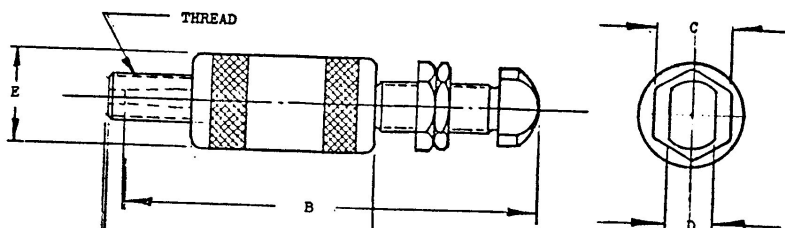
Type III, Class 3 expanding tools, plunger type, spark plug inserts
